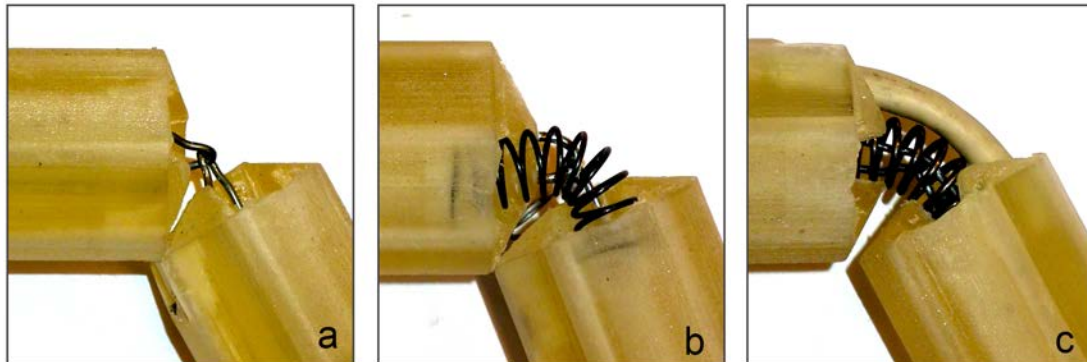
Three important design problems found in the prototyping. a: The chain like hinge has a large radial misalignment, b: a spring does not bend evenly but kinks and blocks a cable inside, c: in a bend there is friction between cable and spring.
